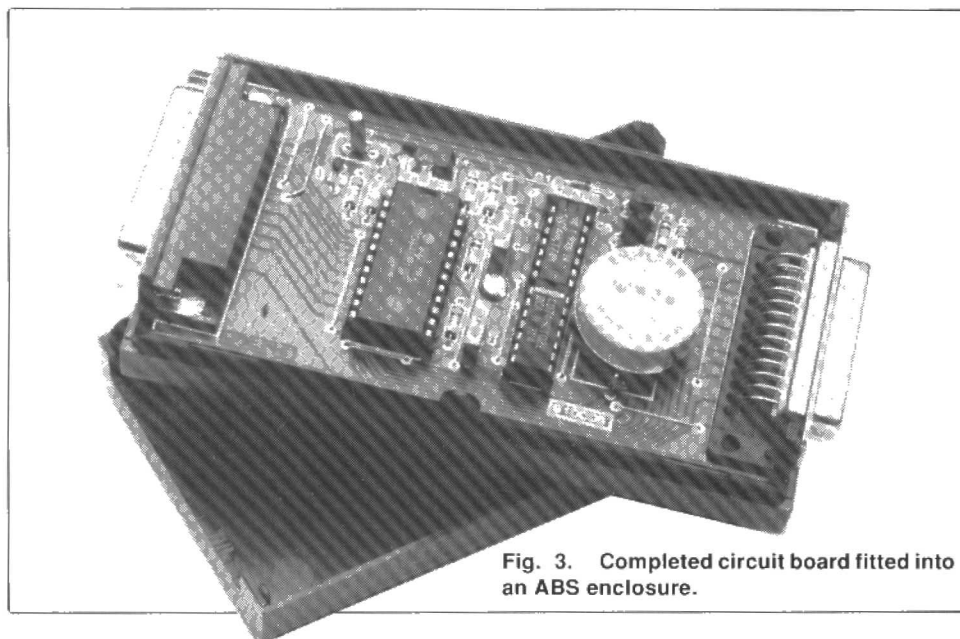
Completed circuit board fitted into an ABS enclosure.
